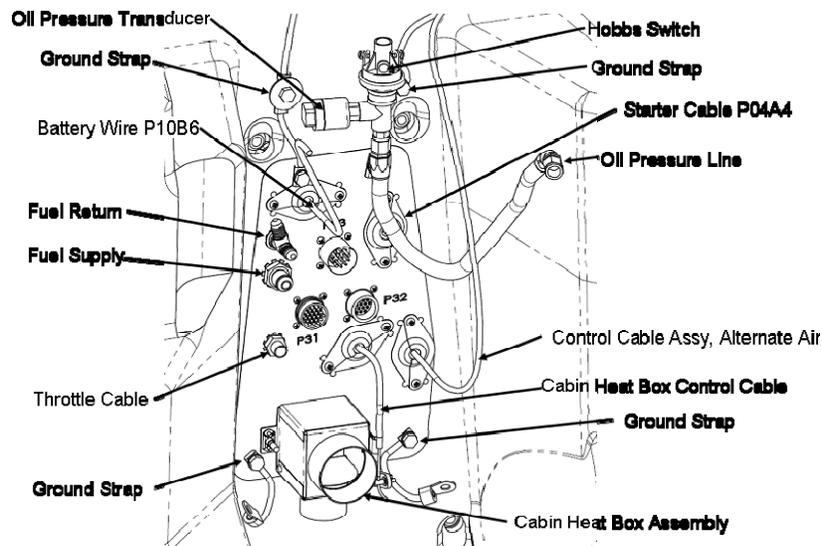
Tunnel Firewall Assembly Disconnects - Engine
